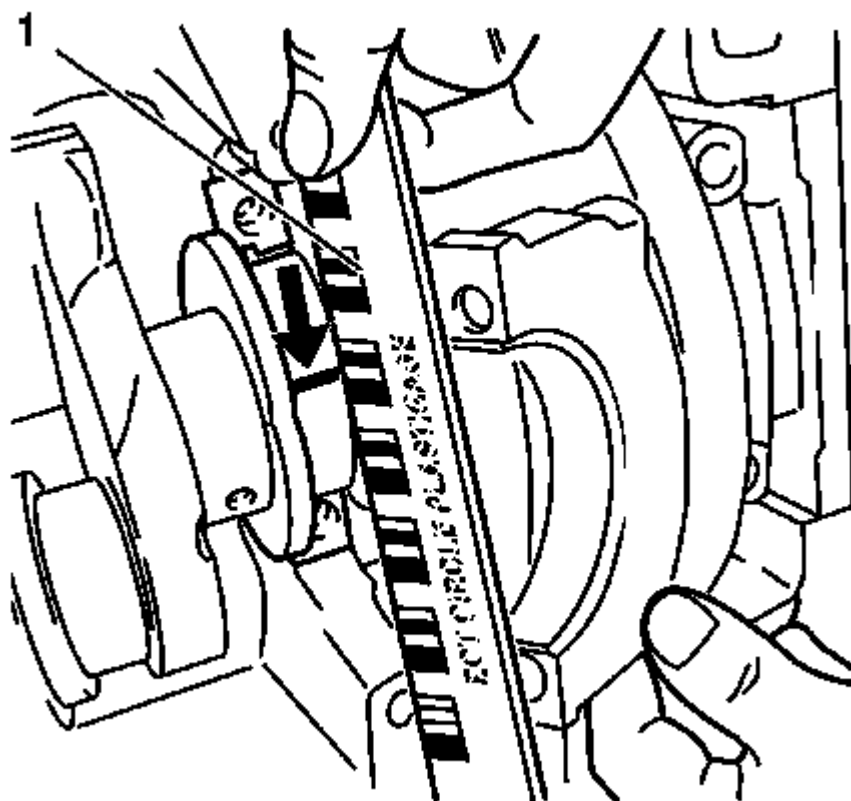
Measuring Crankshaft Bearing Play Using Measuring Scale
